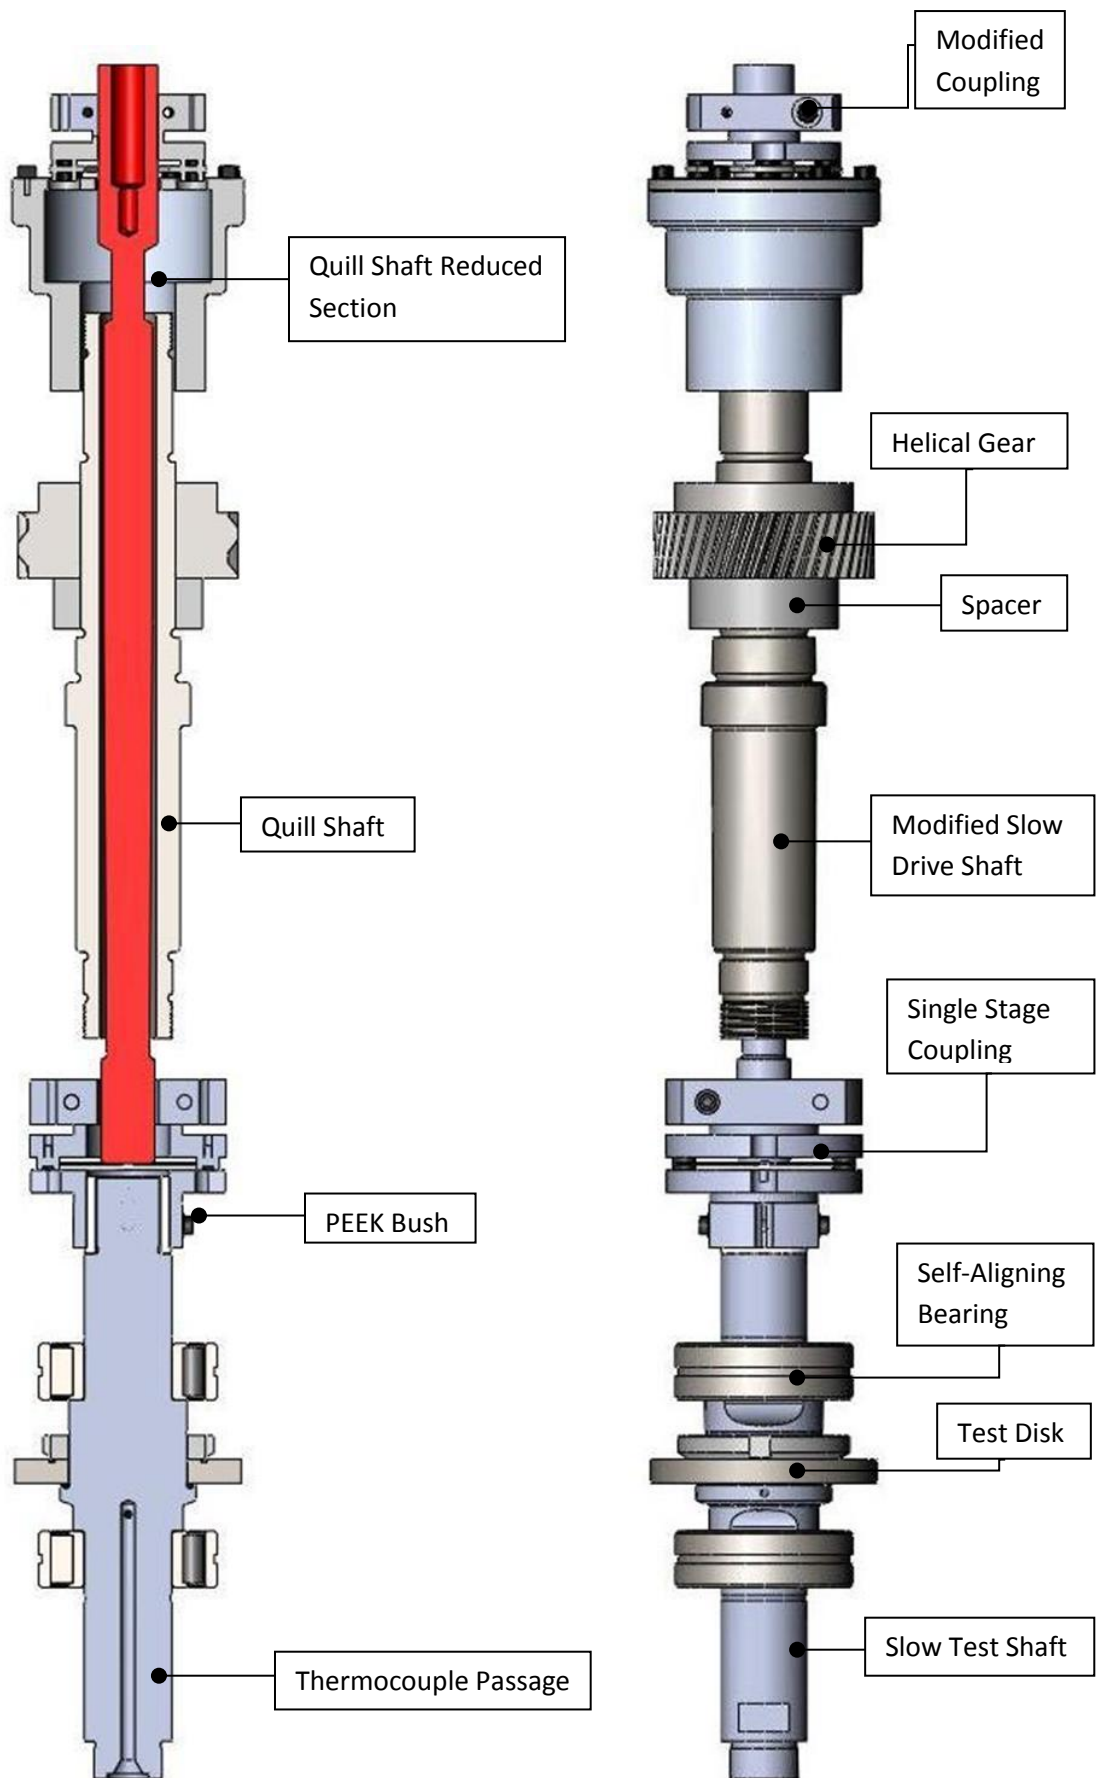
3D CAD model showing slow shaft assembly (right) and section view (left)
